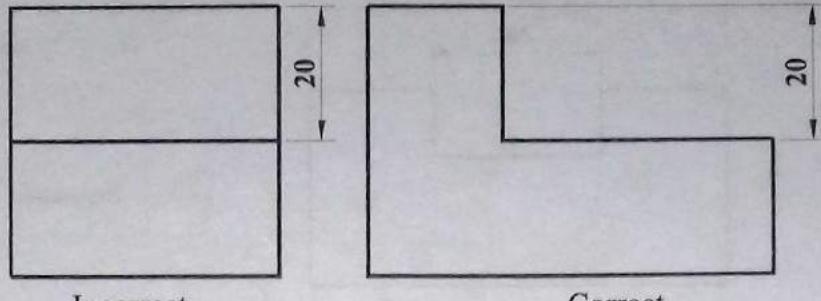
Dimension should be placed on a view which represents the object more clearly
